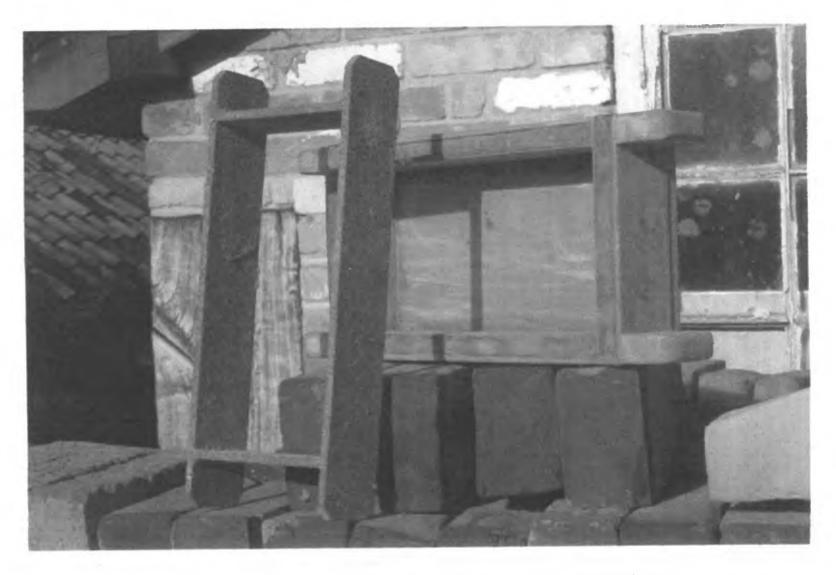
Normal steel stock mould and a wooden box mould, with representative bricks beneath and behind.
